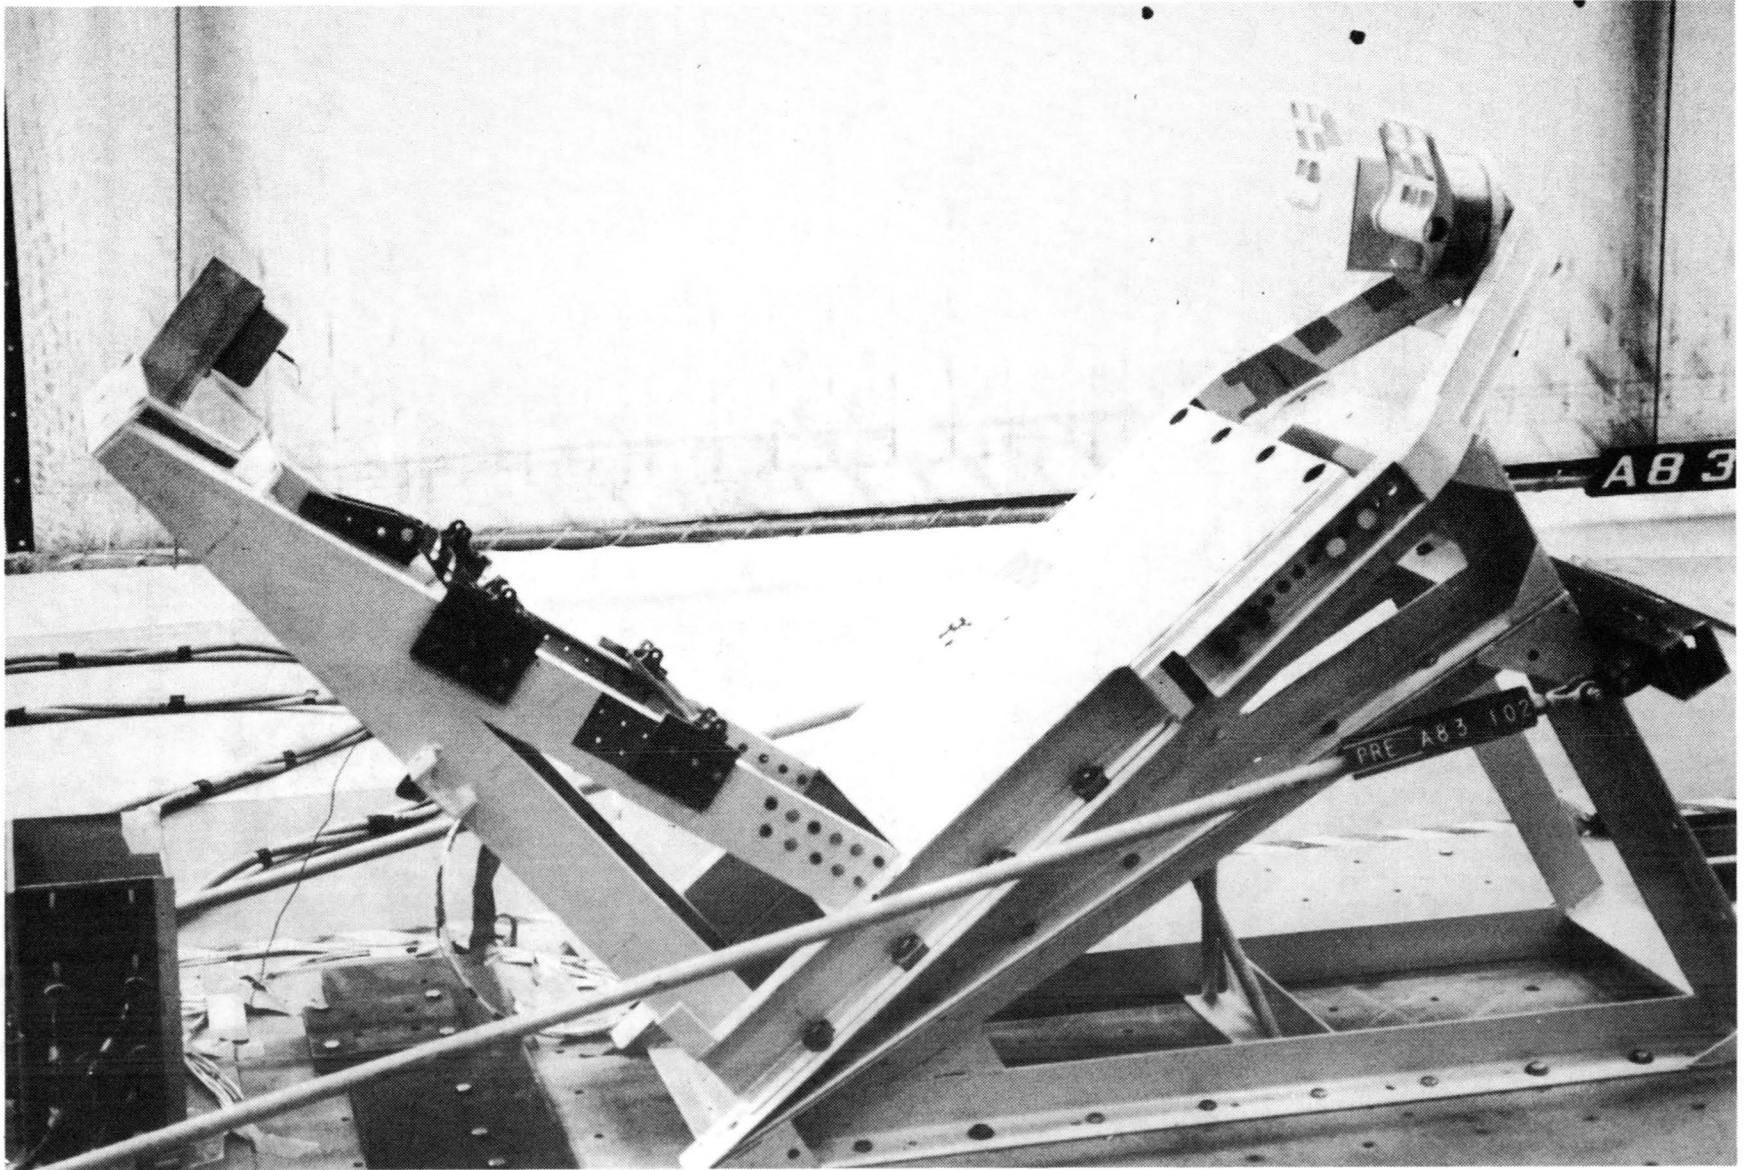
Test fixture used in dynamic seat testing at CAMI.
